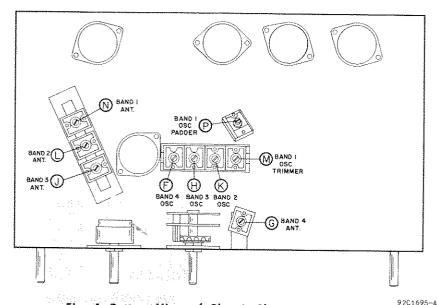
Bottom View of Chassis Showing Location of Alignment Adjustments
